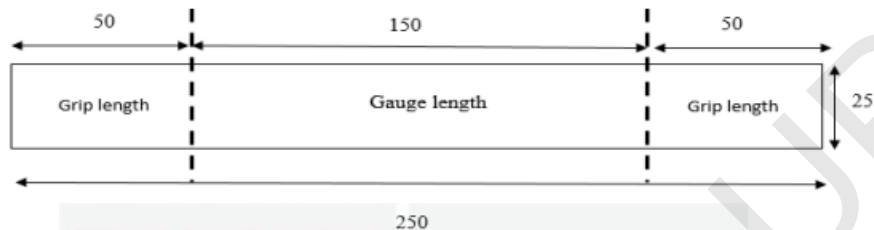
Tensile specimen based on ASTM D3039 standards
